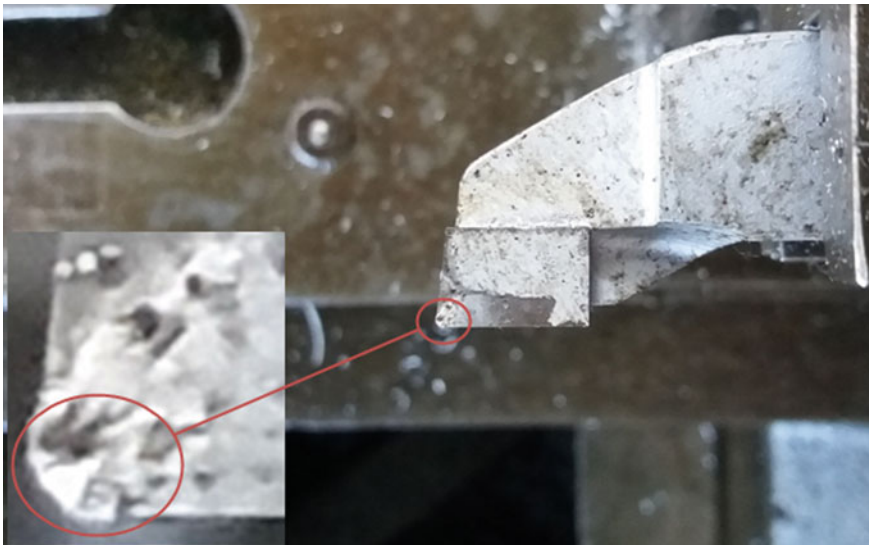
Built-up edge appearance on the tool tip of the carbide brazed cutting insert (Al–Mn matrix)
